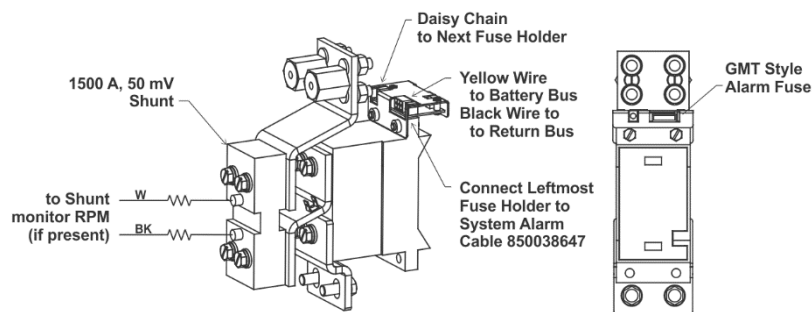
Bolt-in TPL-C Fuse Holder Wiring
